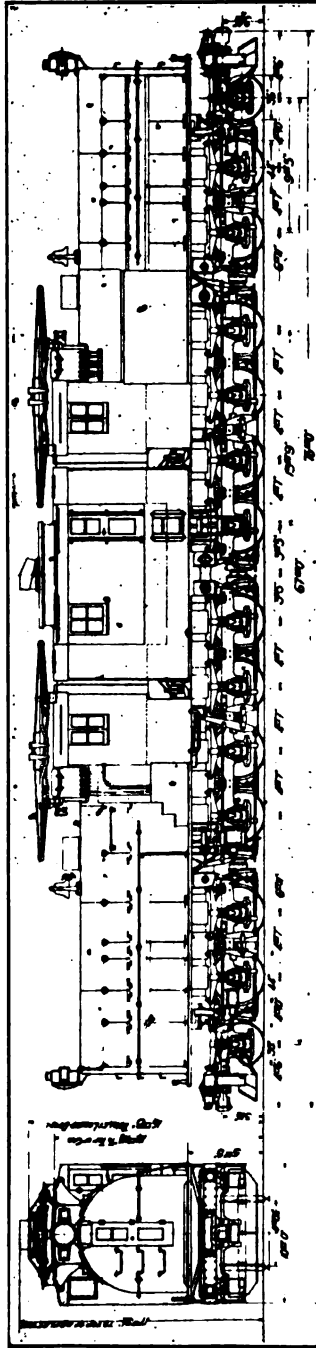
OUTLINE DRAWING AND DIMENSIONS OF LOCOMOTIVE
